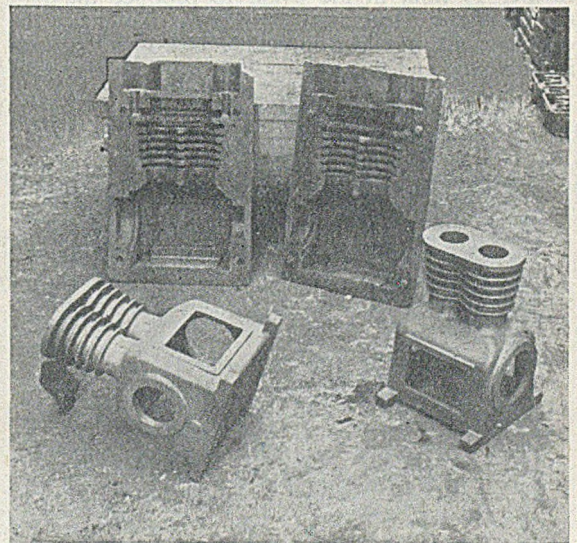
Combined Twin-cylinder Compressor Castings and the respective Shell-mould Parts. These Castings (at 70 lb. each) comprise the Largest of their Type in Regular Production.
